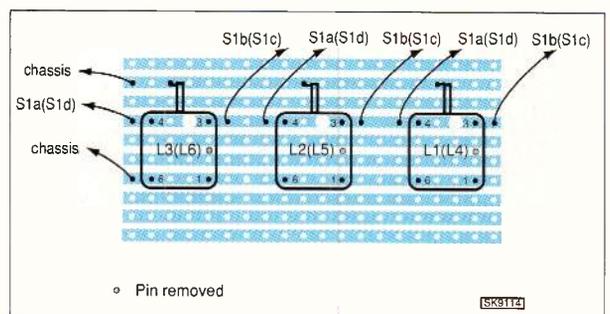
The Veroboard layout showing breaks in tracks and switch connections. The References in brackets show the wiring for the second board.
